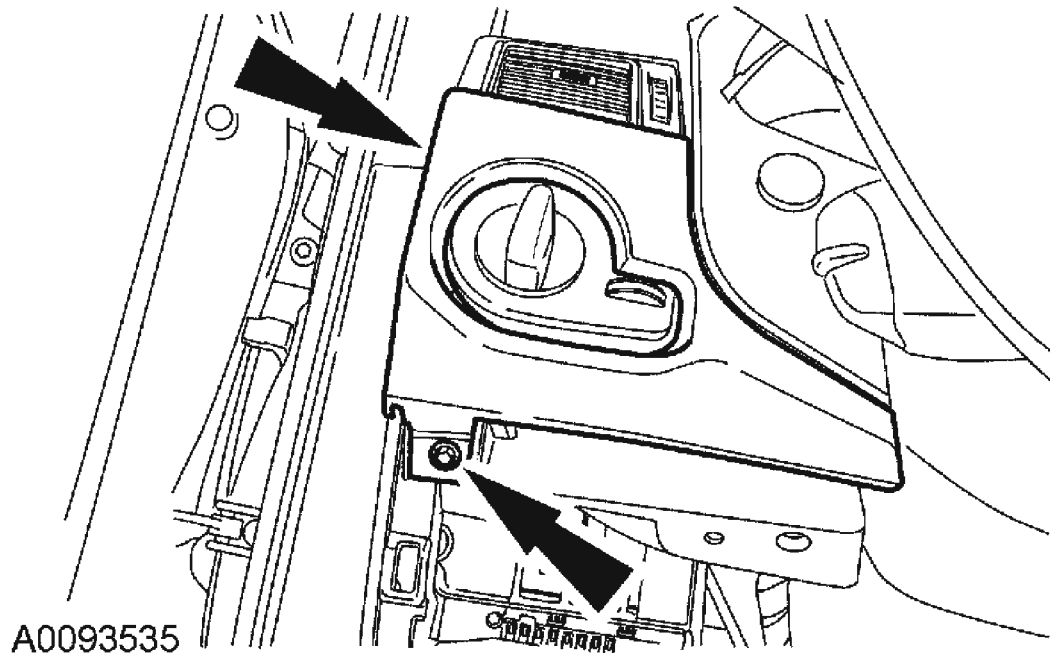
Removing Screw And Detaching Headlamp Switch Bezel
